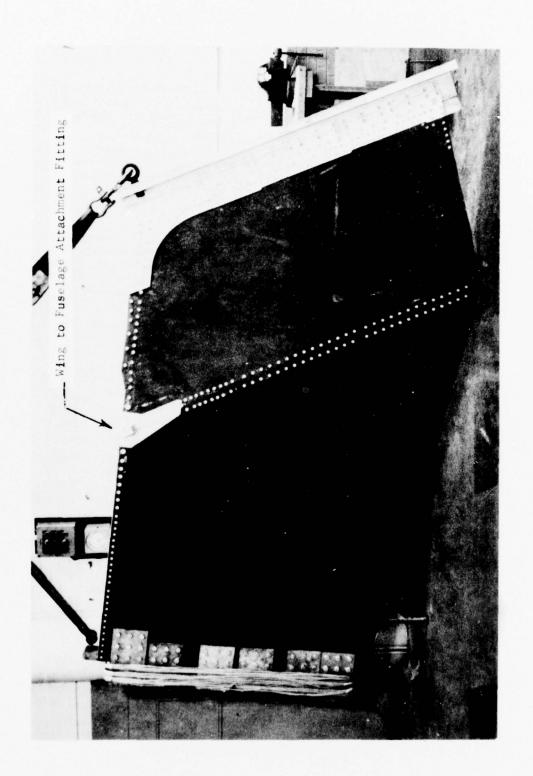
COMPOSITE WING BOX ASSEMBLY - BOTTOM VIEW
